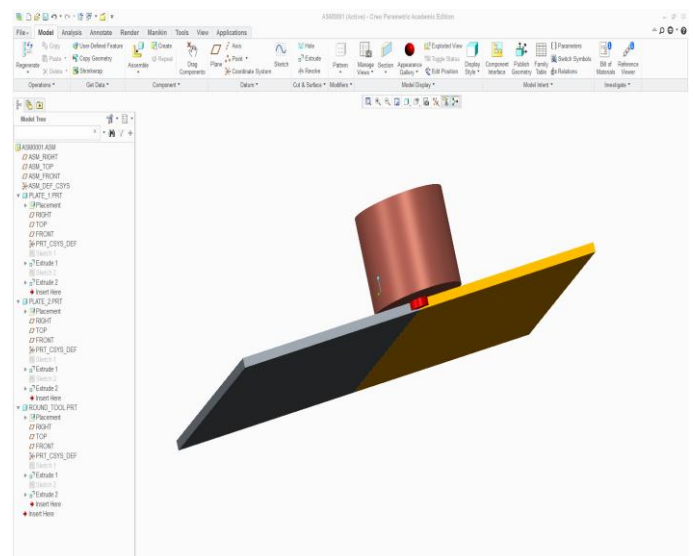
3D Model of round tool and weld plates assembly
